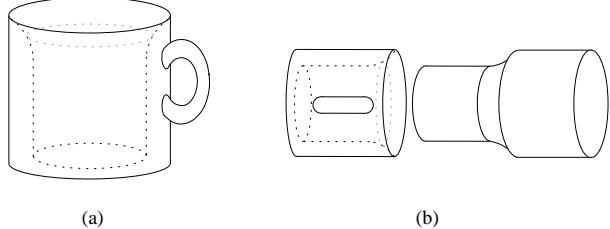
(a) A coffee mug is unattainable using a 2-part cast. (b) By incorporating a side core, the cavity of the coffee mug can be manufactured.
